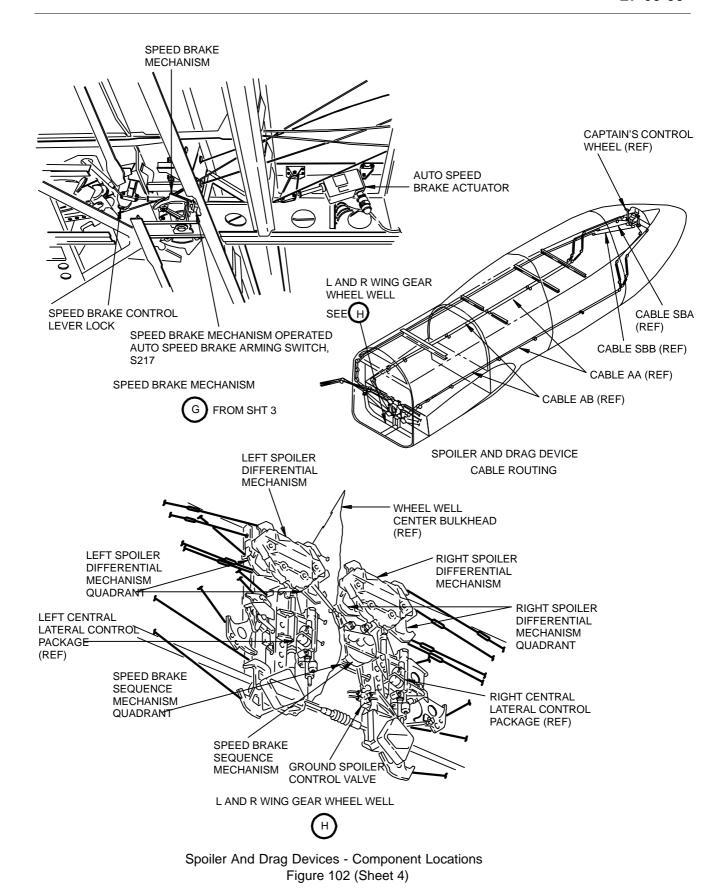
27-60 Spoiler and Drag Devices Comp. Locations Fig. 102 (Sheet 4)
